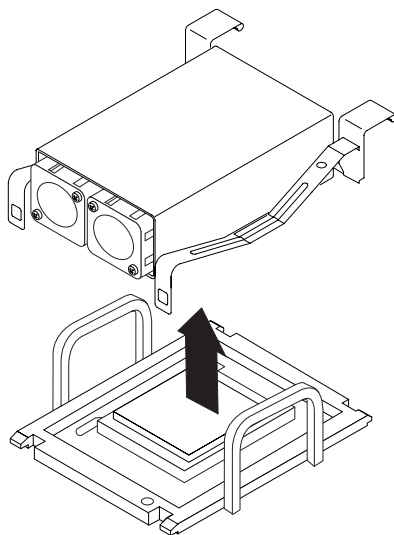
Lifting the Heat Sink from the CPU Socket
